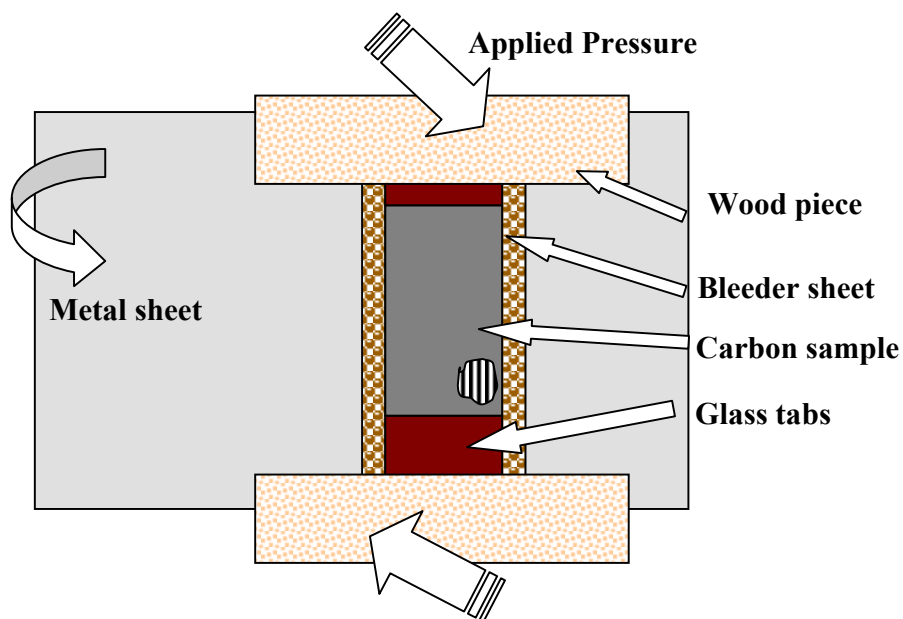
12: Details of the technique used for manufacturing tabs for mechanical testing.
